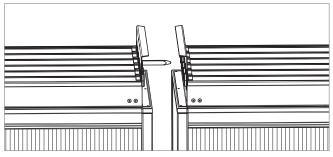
Connecting bolts for damper connection for partitioned exchangers
